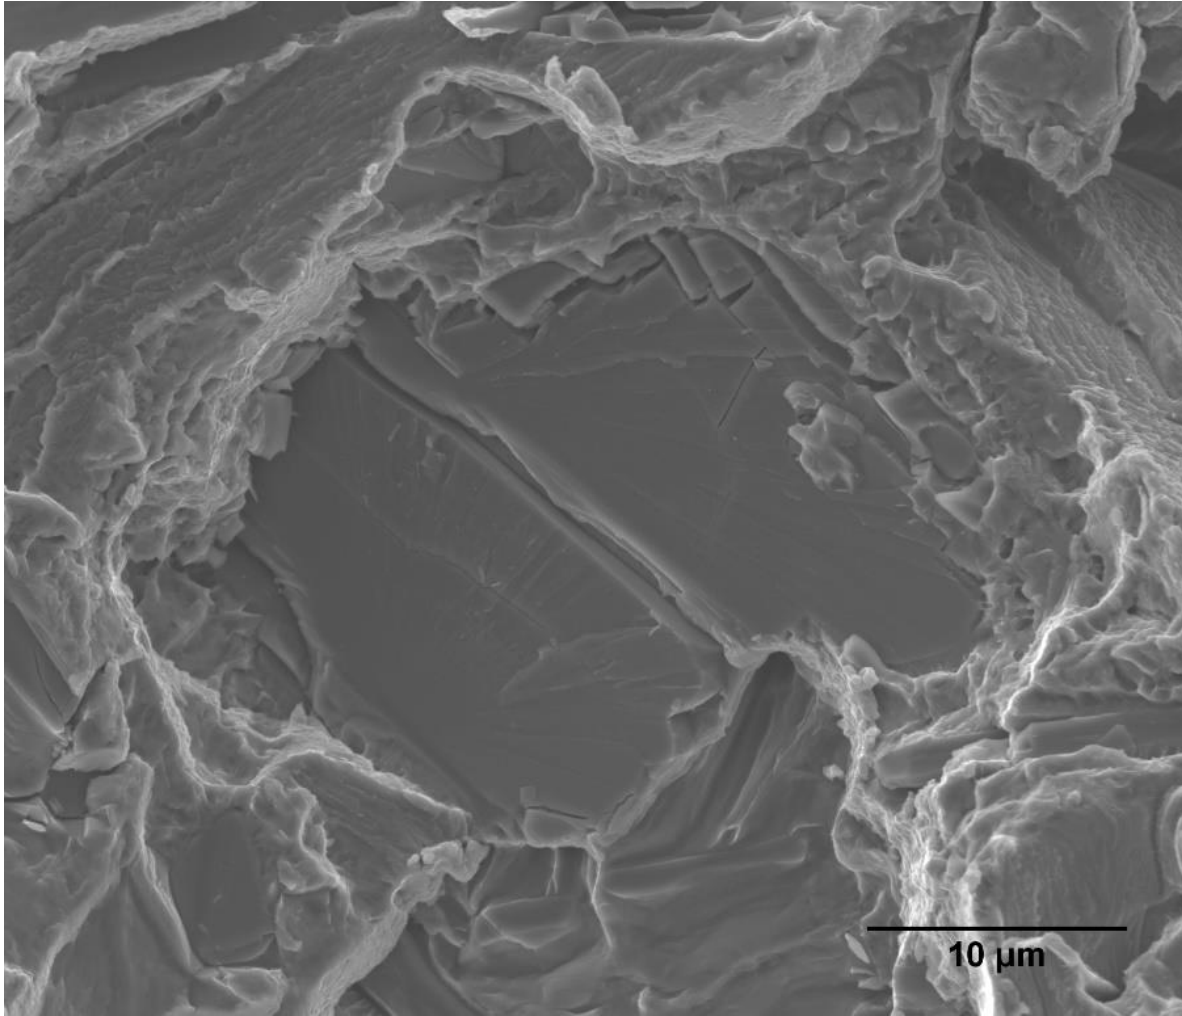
Ti-B fracture surface showing intragranular fracture of an intermetallic
